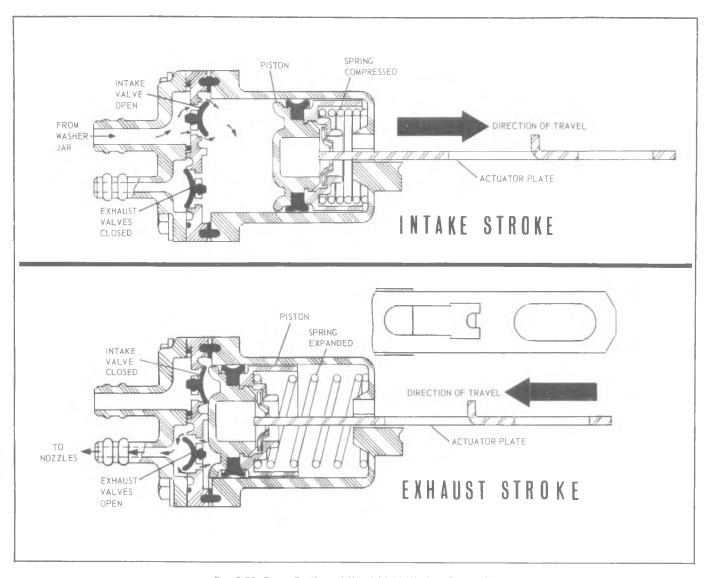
Cross Section of Windshield Washer Pump Valve
